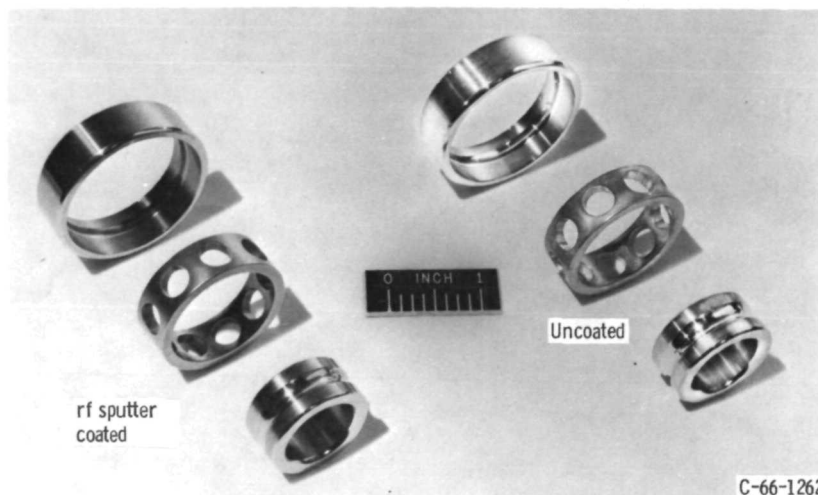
Ball bearing assembly completely coated with  $\text{MoS}_2$  film by rf sputtering.
